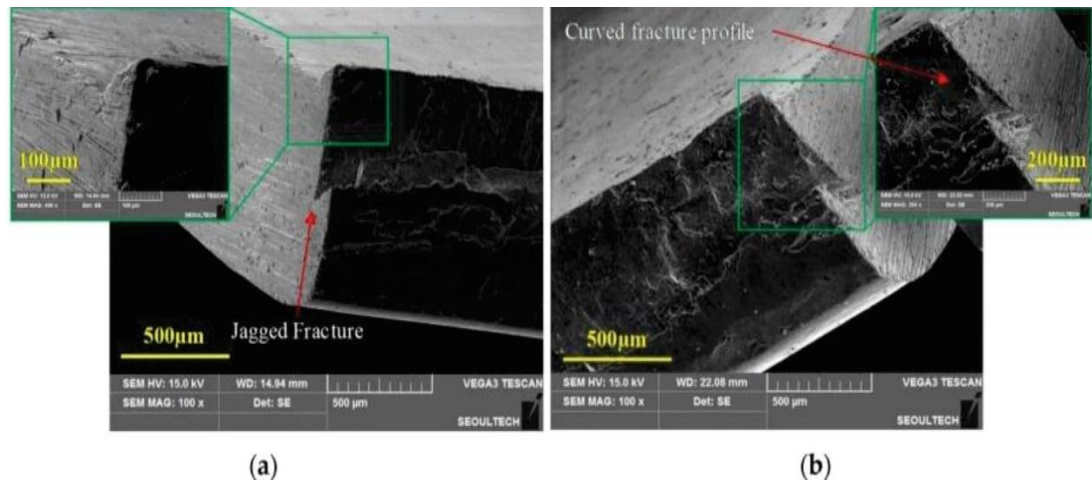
Fracture in magnesium AZ31 (a) A primary rough fracture is shown on the side; (b) The profile of the secondary curved fracture is shown on the side [42].
